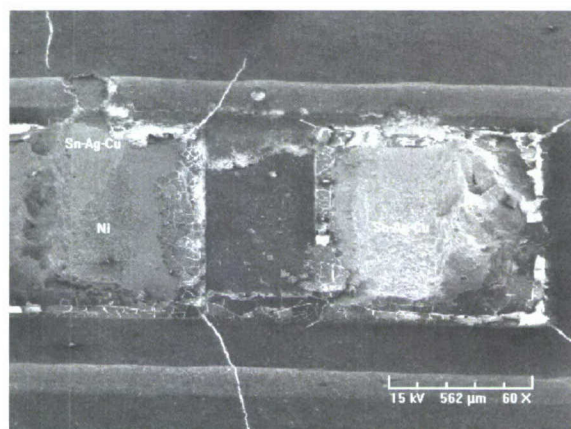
Fracture Surface of SAC305 Solder Joint After Thermal Shock
